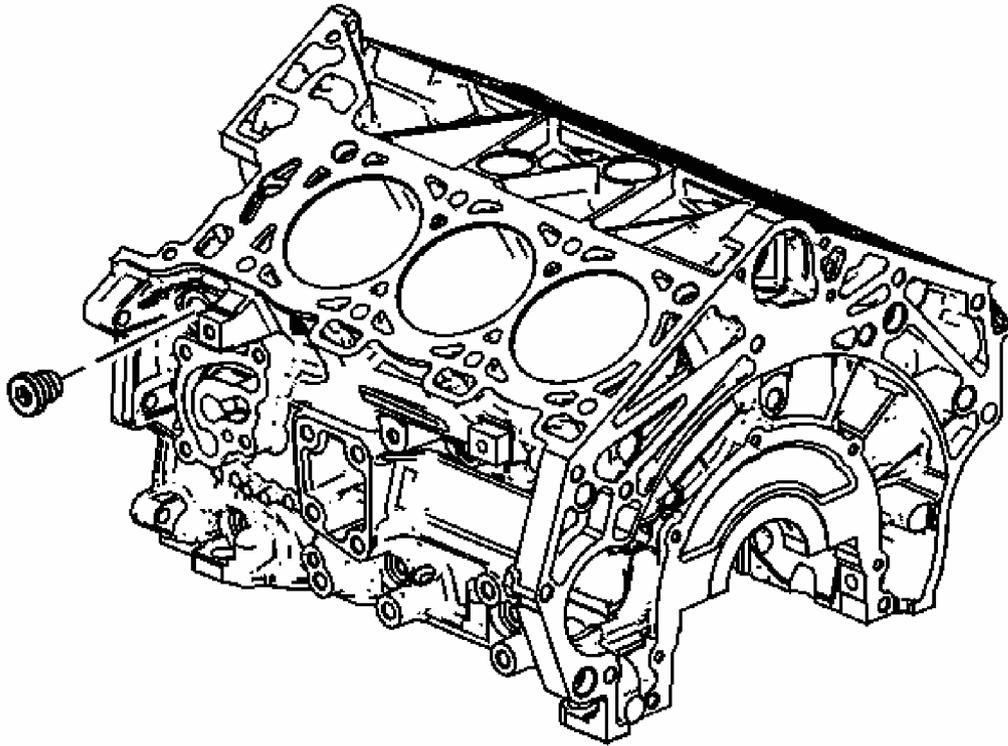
Removing/Installing M20 Left Side Oil Gallery Threaded Plug
